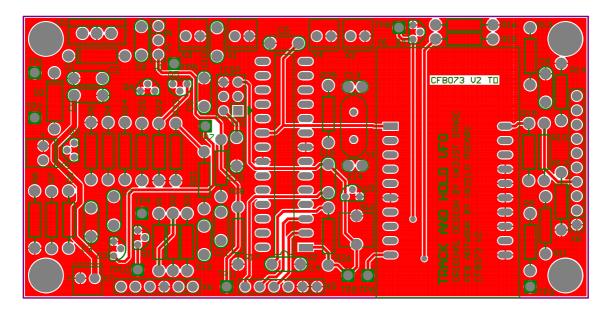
Printed circuit board CFB073 V2 top layer (red)
